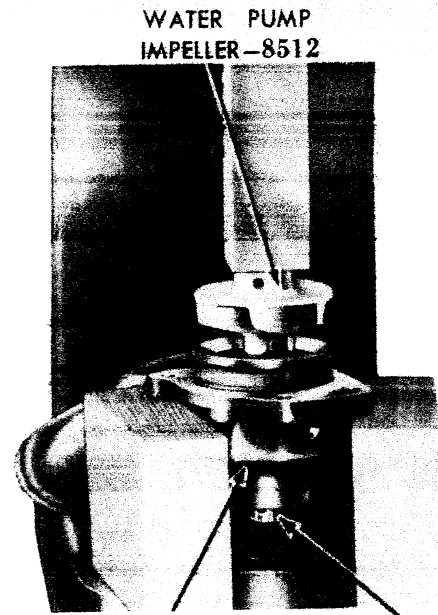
Pressing Impeller and Shaft Assembly Out of Pulley and Housing.
